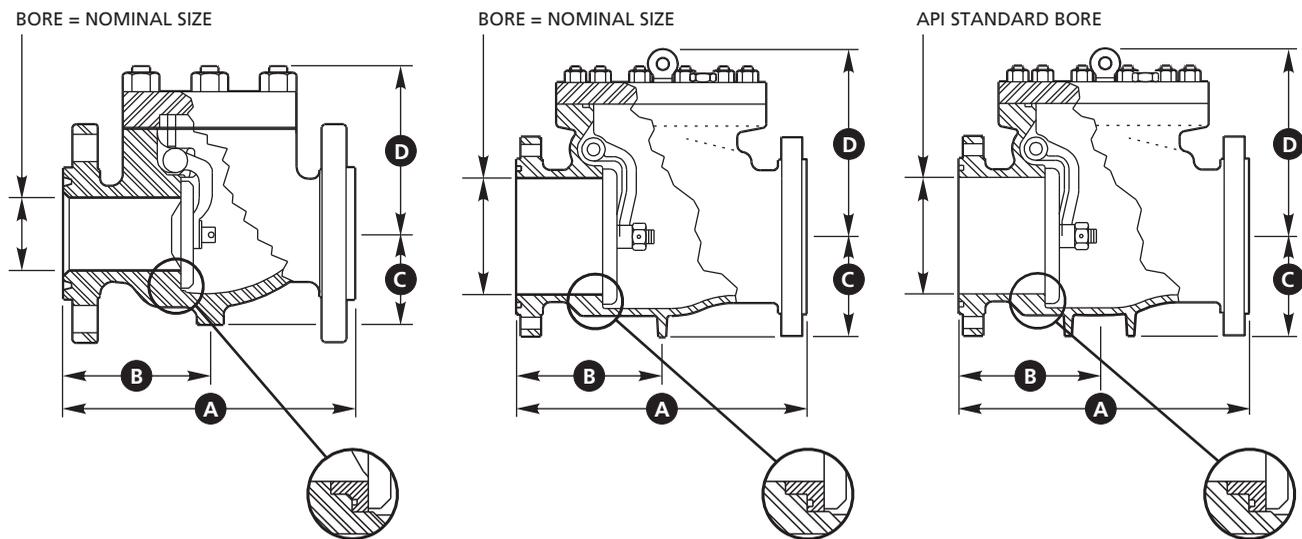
Flanged End (Upstream) x Weld End (Downstream)
